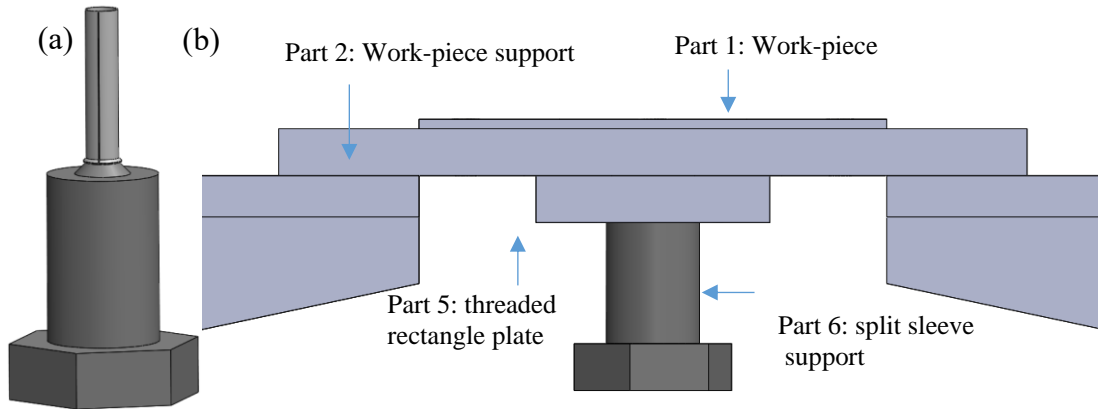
a) Split sleeve support, b) final assembly of split sleeve support
